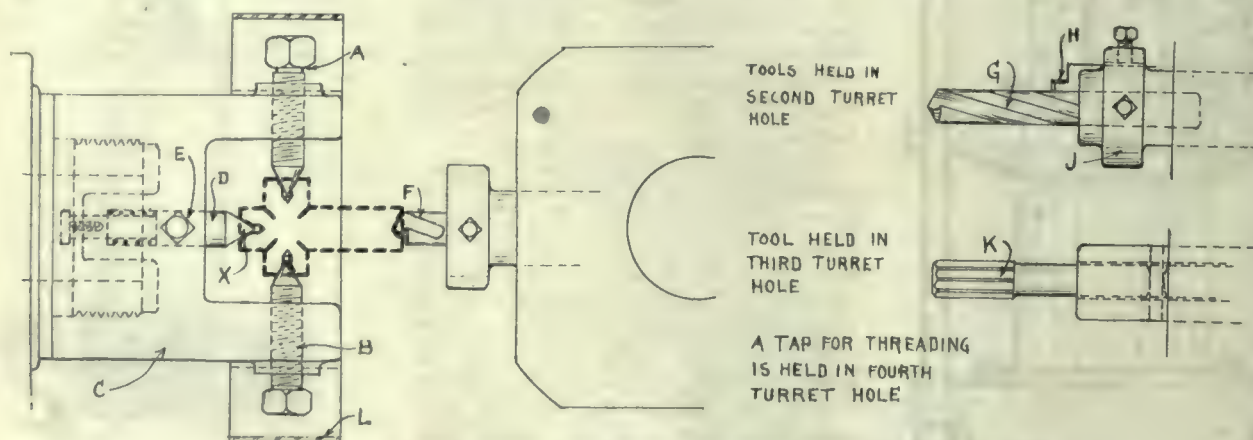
METHOD OF TOOLING UP TURRET LATHE FOR MACHINING HOLE.
